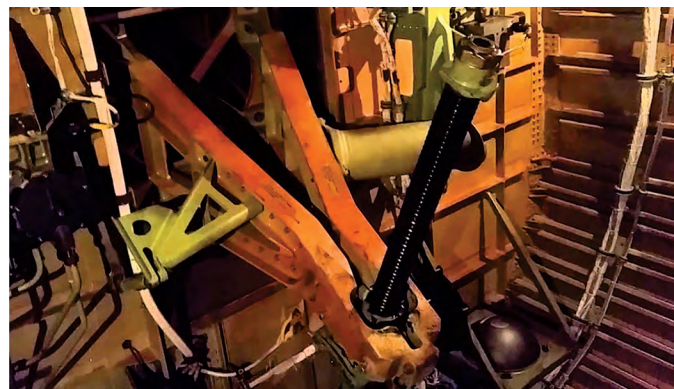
A jackscrew control arrangement on a Boeing 737-NG horizontal stabilizer.
